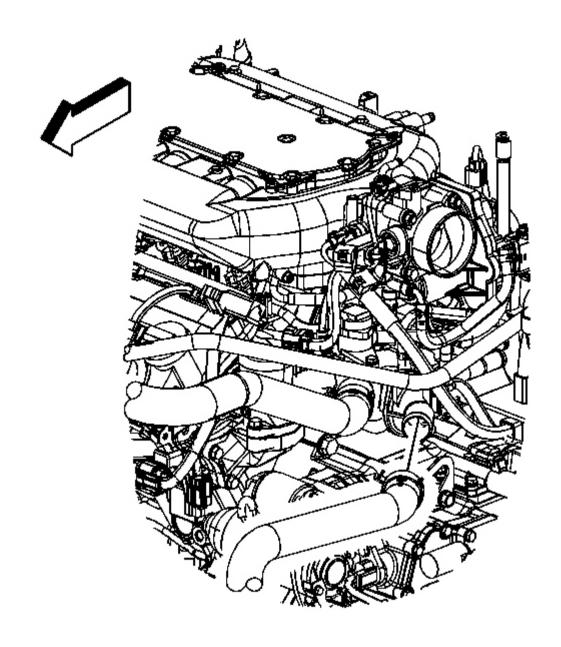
View Of Radiator Hose Courtesy of GENERAL MOTORS CORP.
